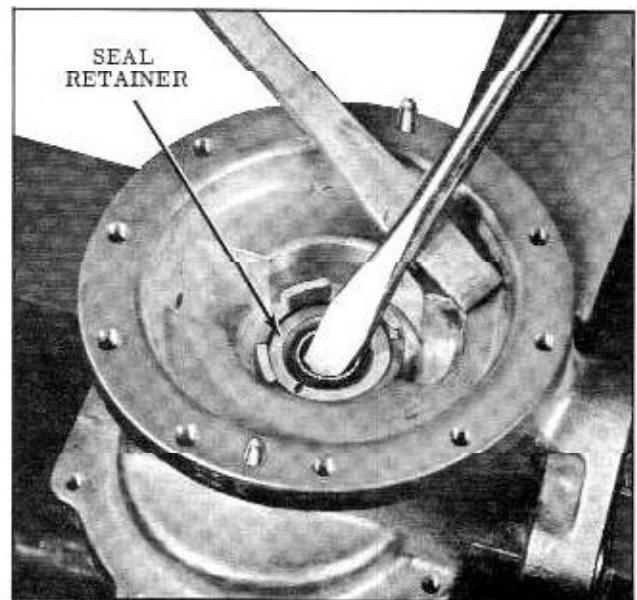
Removing Fuel Pull Rod Seal and Retainer
